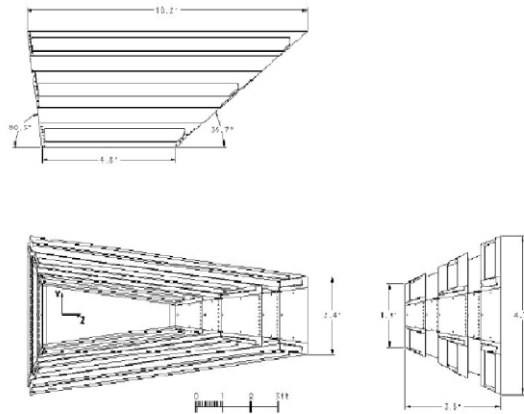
Top, bottom, and side views of the assembled drift chamber for a sector giving overall dimensions.
